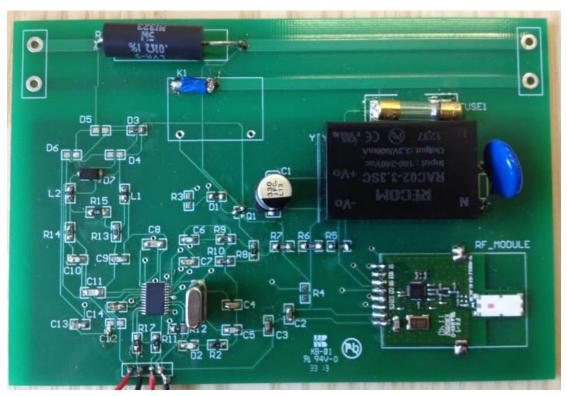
below shows a real photo of the Smart-plug electrical board.
